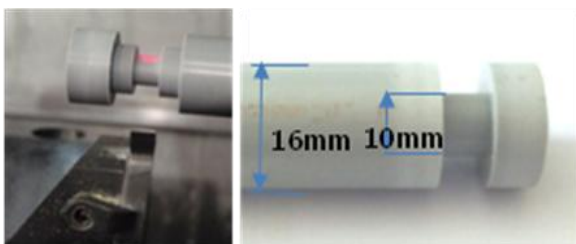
Photographs of laser-assisted groove turning tool and workpiece
